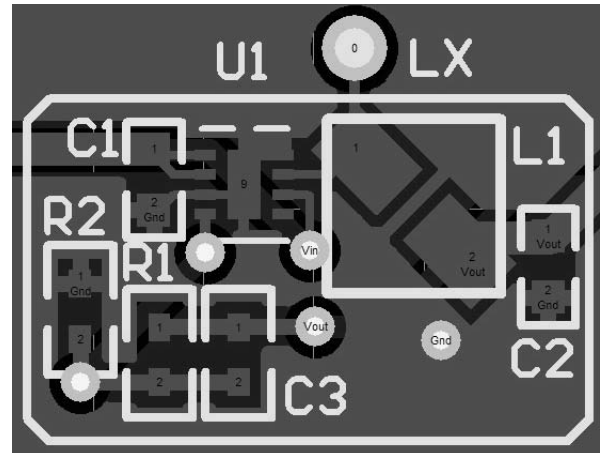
Exploded View of AAT2120 Evaluation Board Top Side Layout.
